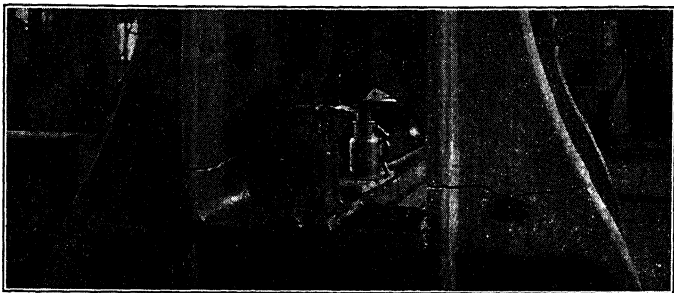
Cracks in a cast iron end frame before preparation for welding.
